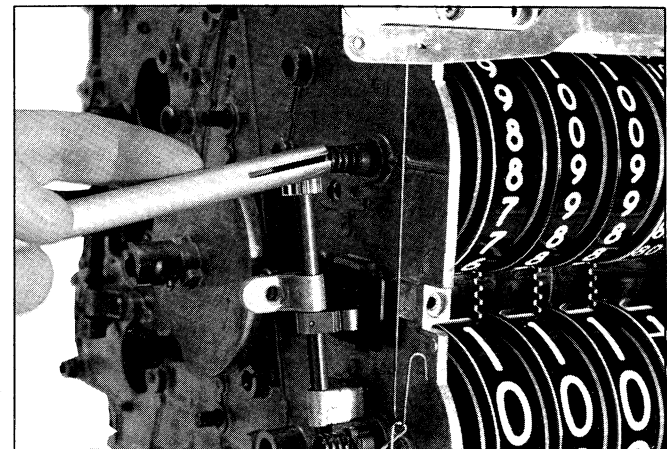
Placing open slotted end of long dummy shaft over grooved end of wheel shaft.
